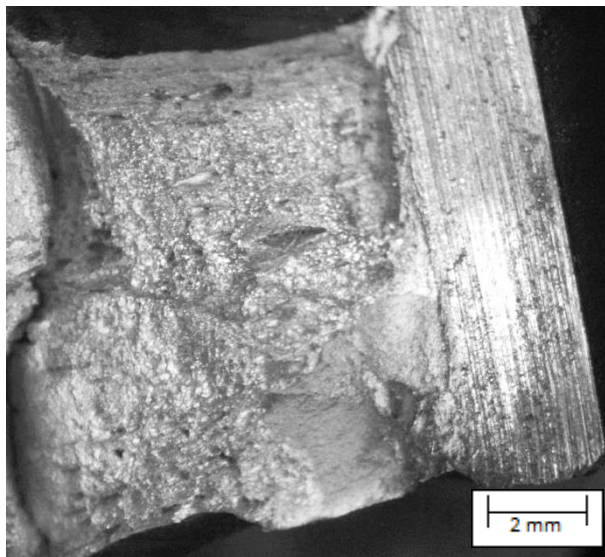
Stereoscopic image of the fracture surface of the HAZ of sample 1 (Heat treated for 579h at 635°C prior to welding and a 672h PWHT at 635°C).
